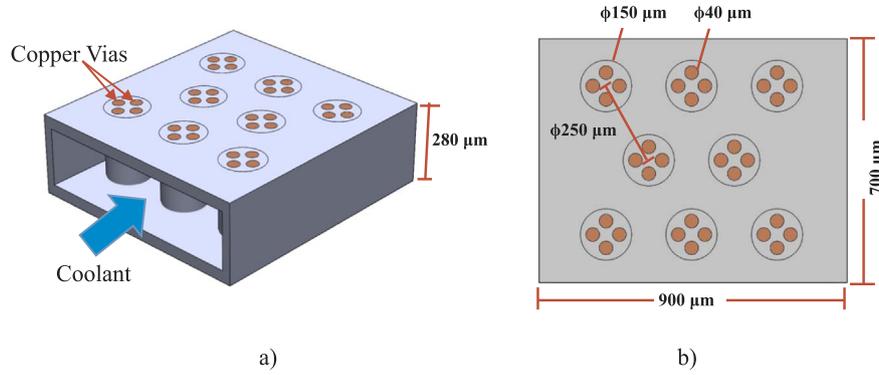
Single stack cooling design with integrated TSVs, a) 3D view, b) top view with dimensions.
